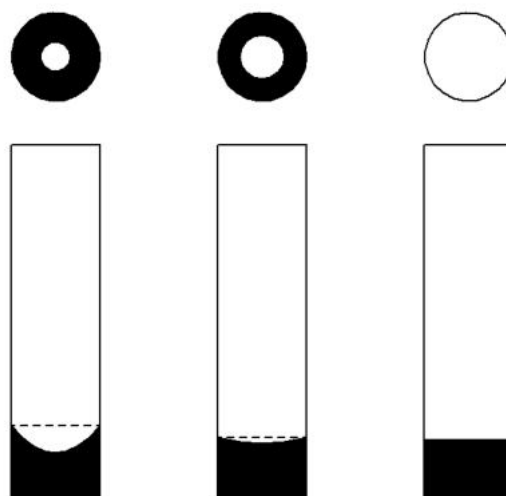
Examples of the correct and bad layout of the solder in the sealant cell
